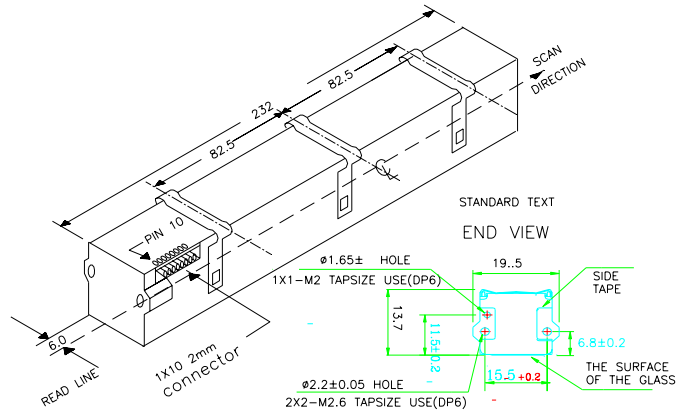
AMIS-710325-A4 Mechanical Dimensions
